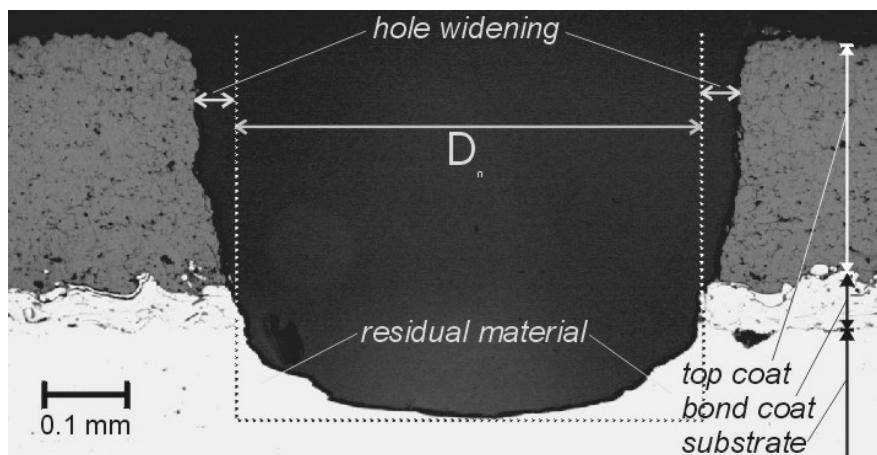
Cross-section of drilled 0.3 mm specimen showing hole widening and non-ideal hole shape. The hole diameter is about 1 mm.
